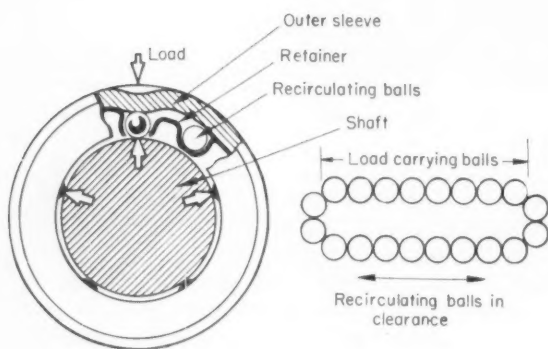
Basic working parts of the Thomson ball bushing. Designed for linear motion only, the ball bushing contains three or more "loops" or complete circuits of balls. Balls in one portion of the circuit carry the load between the outer sleeve and the shaft. A retainer recirculates the balls to their starting points. The complete assembly has no loose parts, and the ball bushing can be removed as a unit from the shaft.
